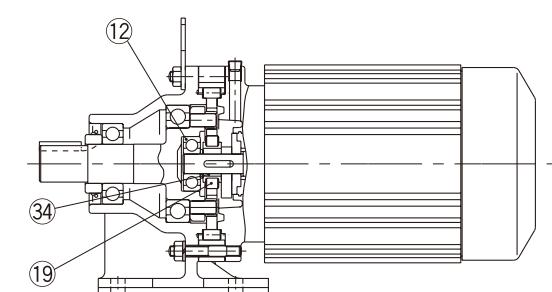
Type CNHM (Horizontal, Gearmotor) Single reduction
